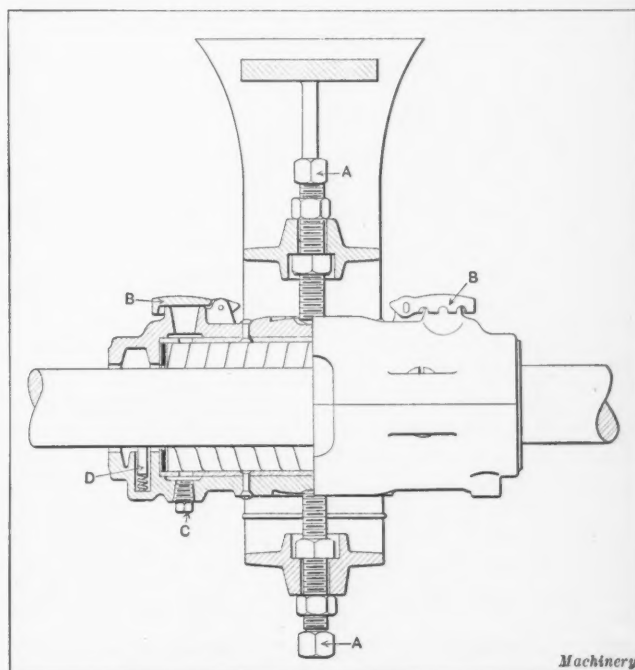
Lineshaft Hanger equipped with Split Roller Bearing Box which has been substituted for Plain Bearing Box
